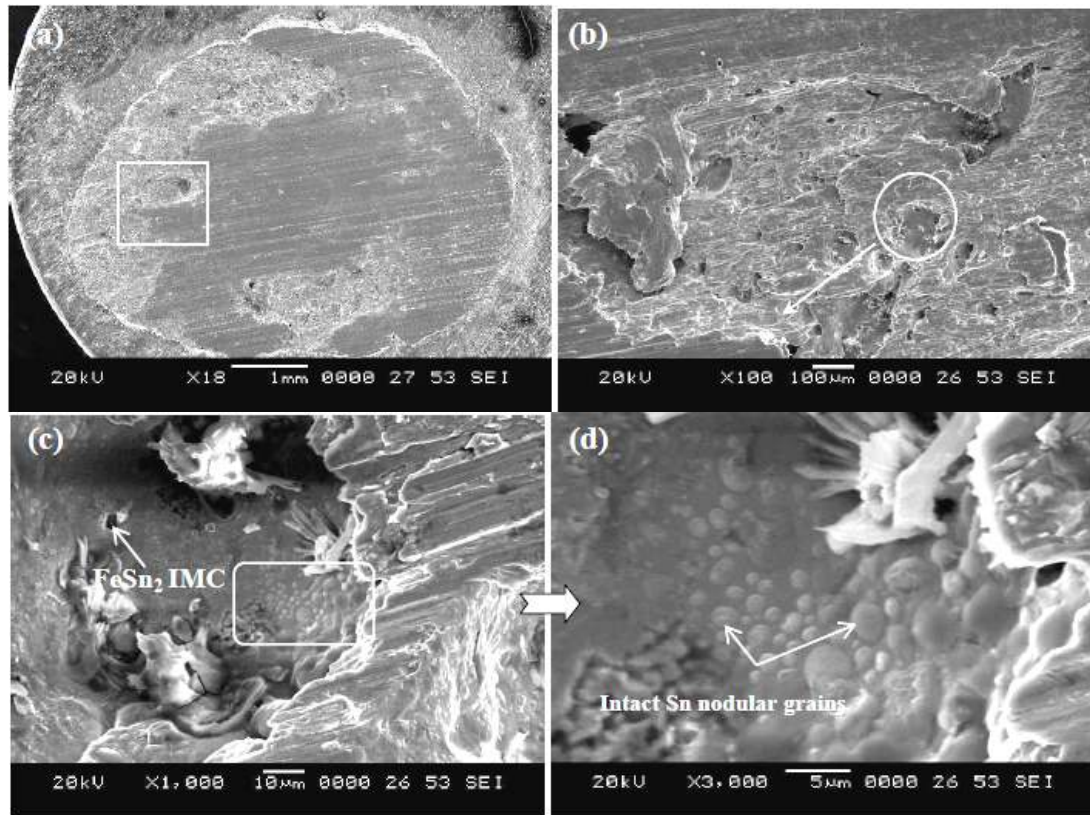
SEM micrographs of the fractured surfaces of Sn-0.3Ag-0.7Cu solder on belt Fe-Ni substrate surface (a), (b) lower magnification (c), (d) higher magnification
